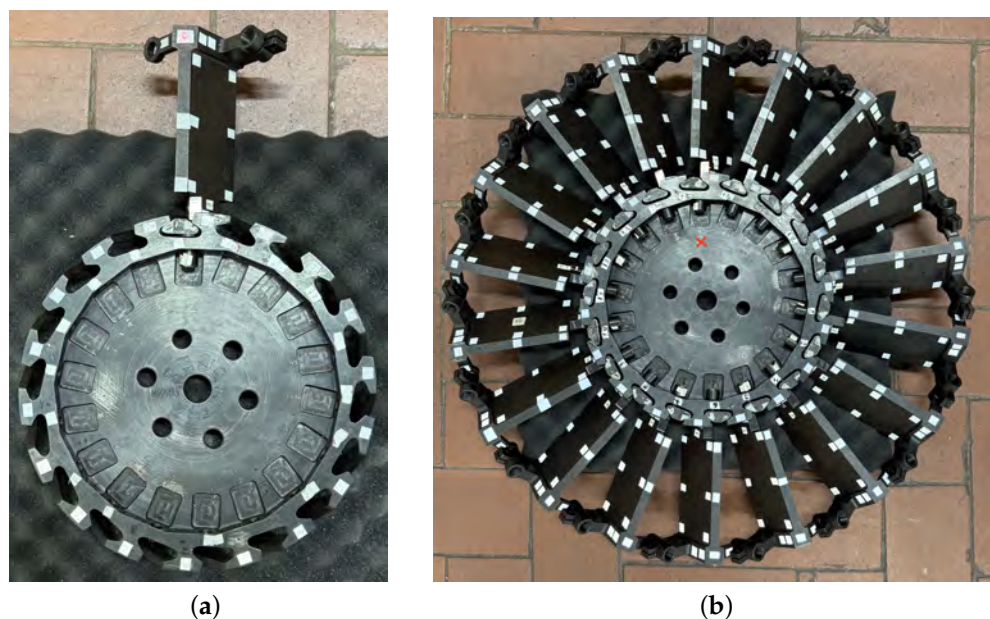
(a) Disk-one-blade assembly; (b) full-bladed disk assembly. Red cross indicates the excitation point.
